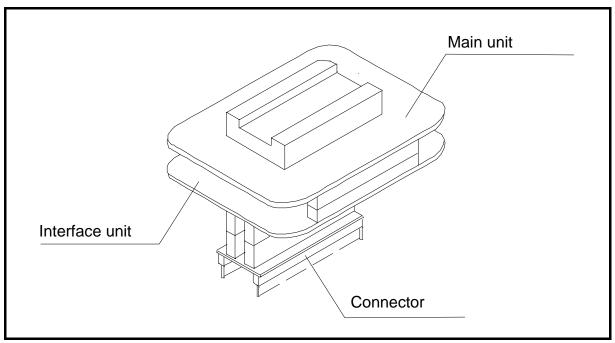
External view of the programming adapter (DIP type IC socket) and constituent parts
